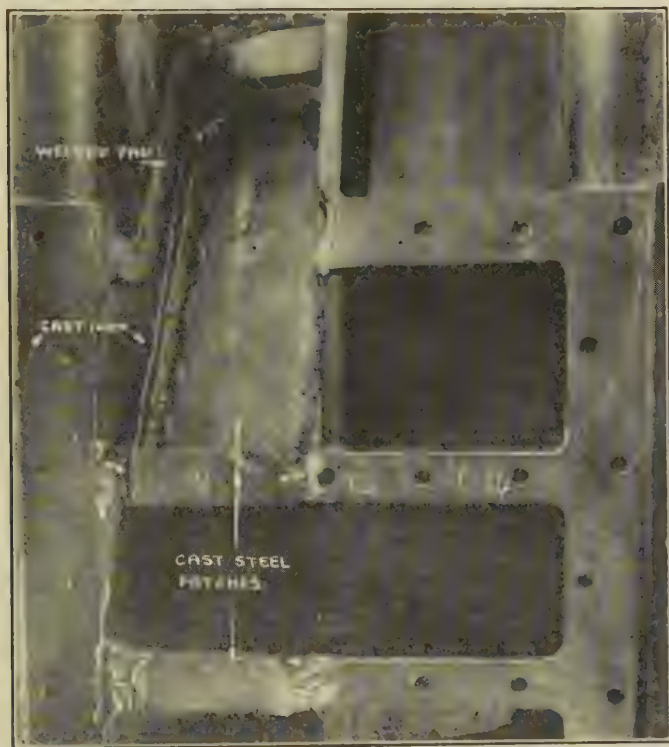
Cast-iron high-pressure cylinder of S.S. *Rondo* showing two ports welded.
